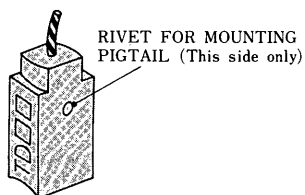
Inserting-Direction Mark (Rivet) for Brush
